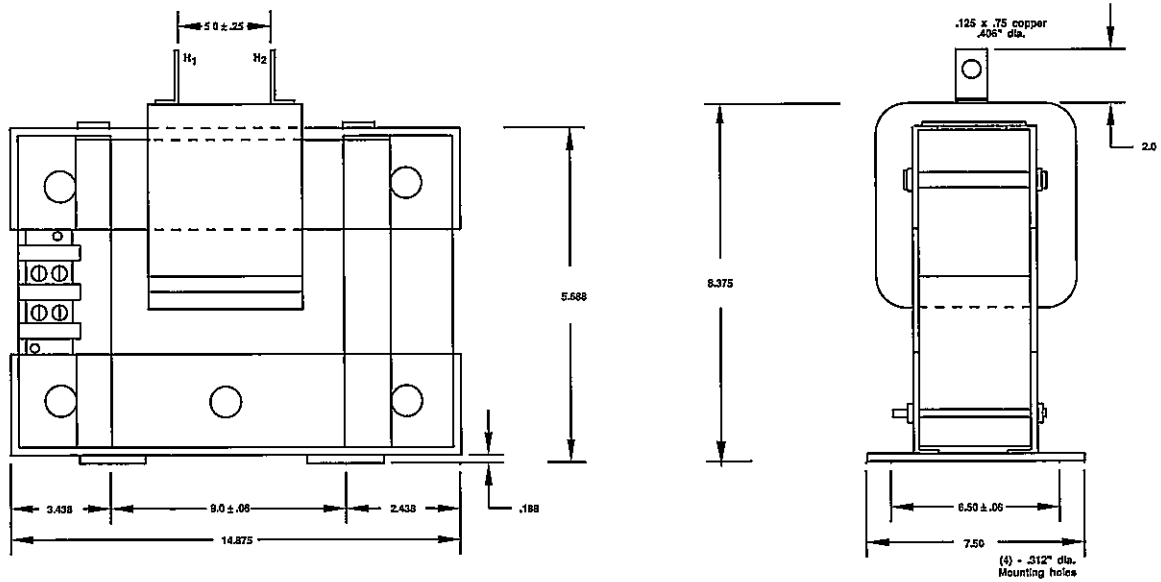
OUTLINE DRAWING BE 25925-001.
